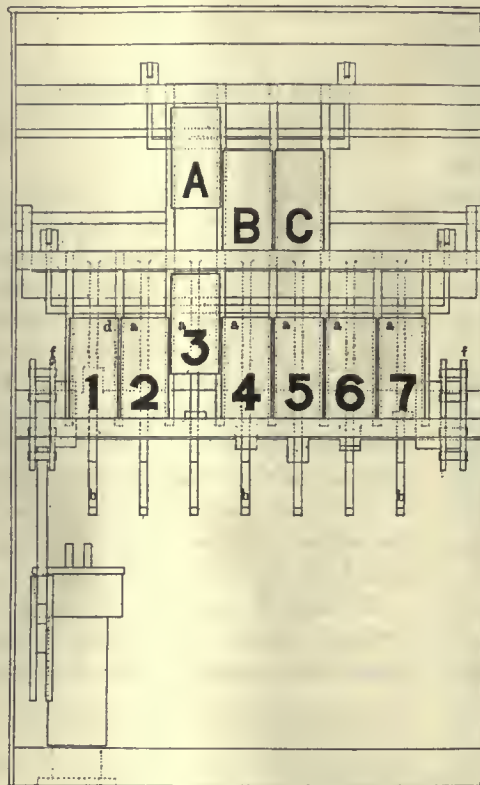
FRONT WITH APERTURED DIAL REMOVED
